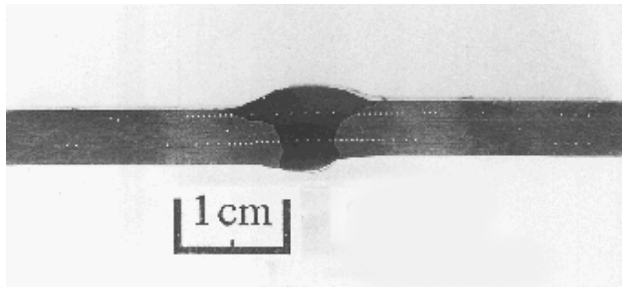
Points of hardness measurements in the middle and top layers of a full penetration butt weld [14]. RHS 150x150x6, face E = 1, filler metal OK 63.20.
